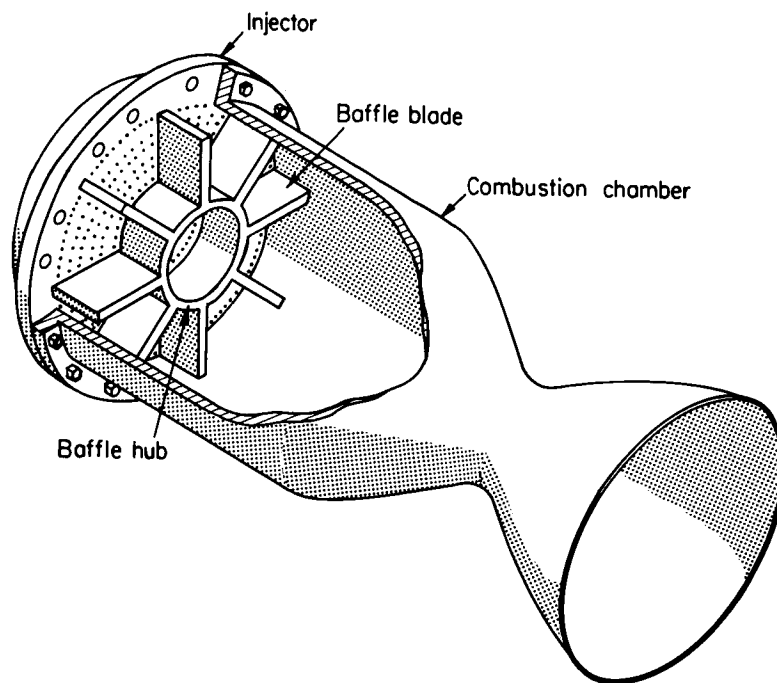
Cutaway sketch of combustion chamber showing injector-face baffle.
